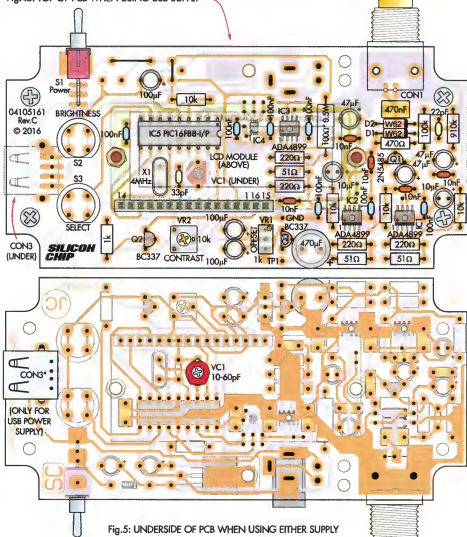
UNDERSIDE OF PCB WHEN USING EITHER SUPPLY
